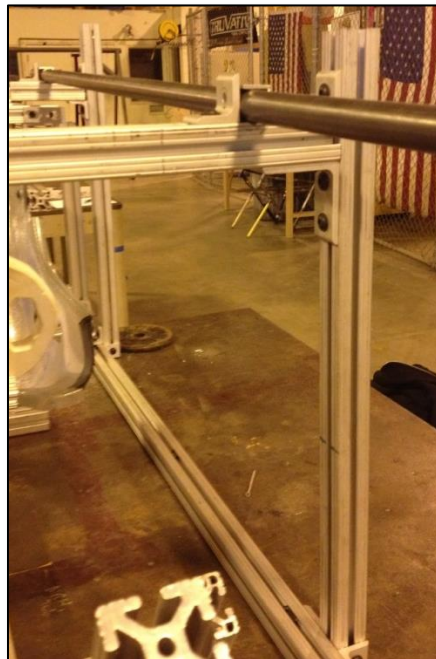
Top Side Impact Tube in Cockpit Mockup
